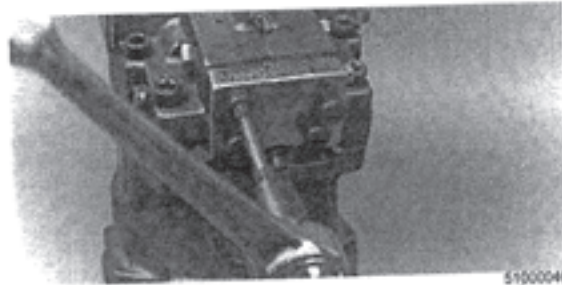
Remove Minimum Angle Servo Cover Screws
